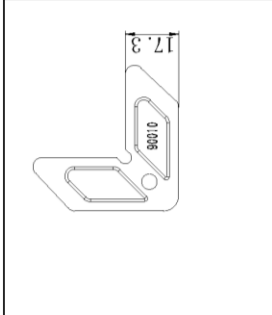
Drawing of Accessory Components 1 (Details of Gasket)
